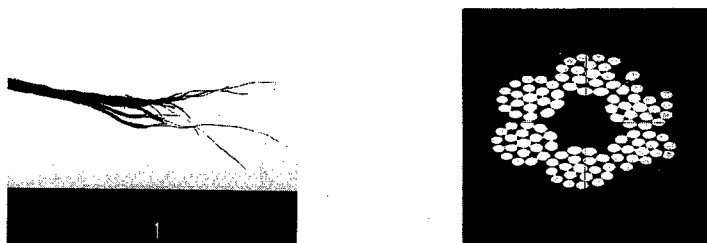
The fracture part of the wire rope. Fig. 6. The cross section of this wire rope.
